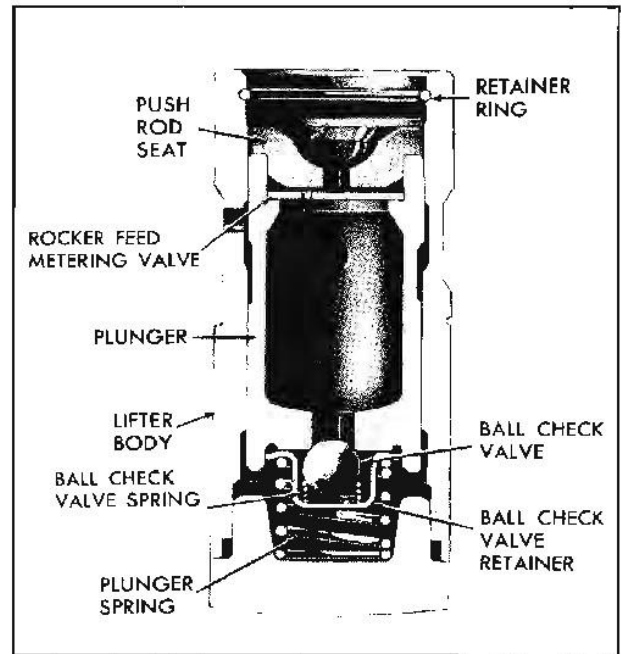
Sectional View - Valve Lifter - 326 H.O. with Synchronesh
